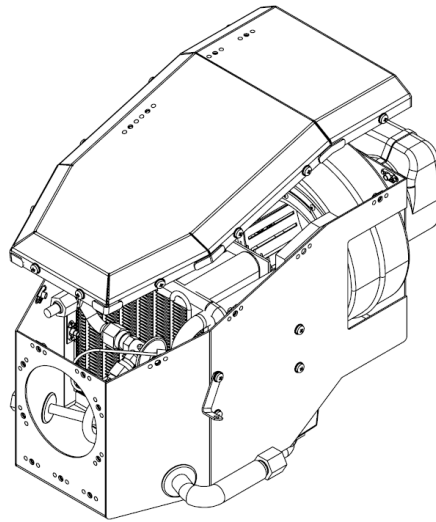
Evaporator Assembly (Remove Lid for accessibility)
